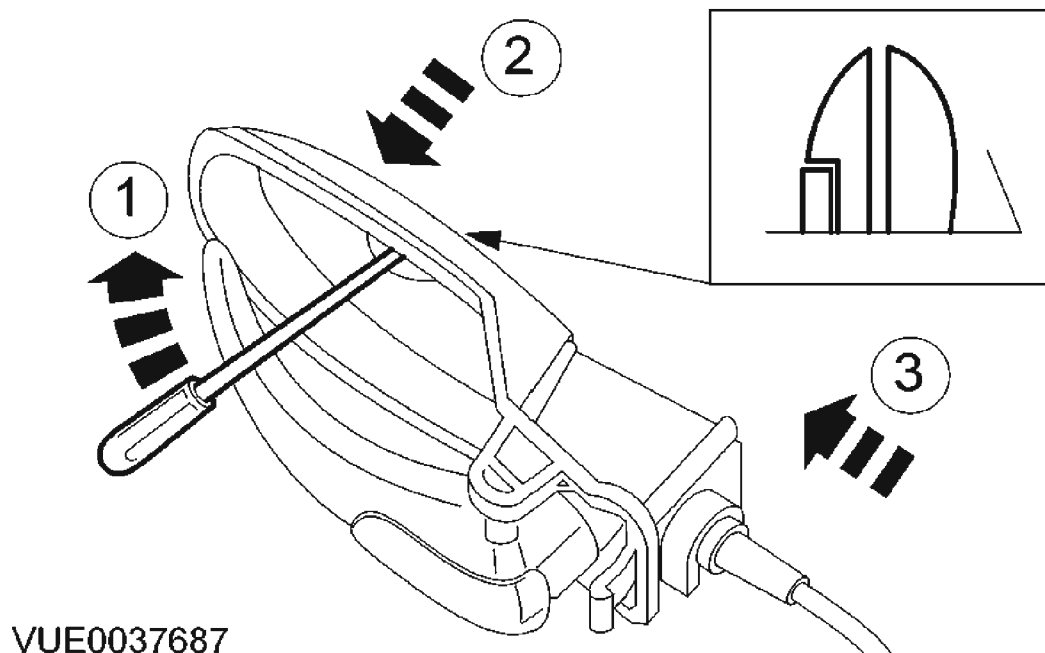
Detaching Door Latch Remote Control From Inner Panel
